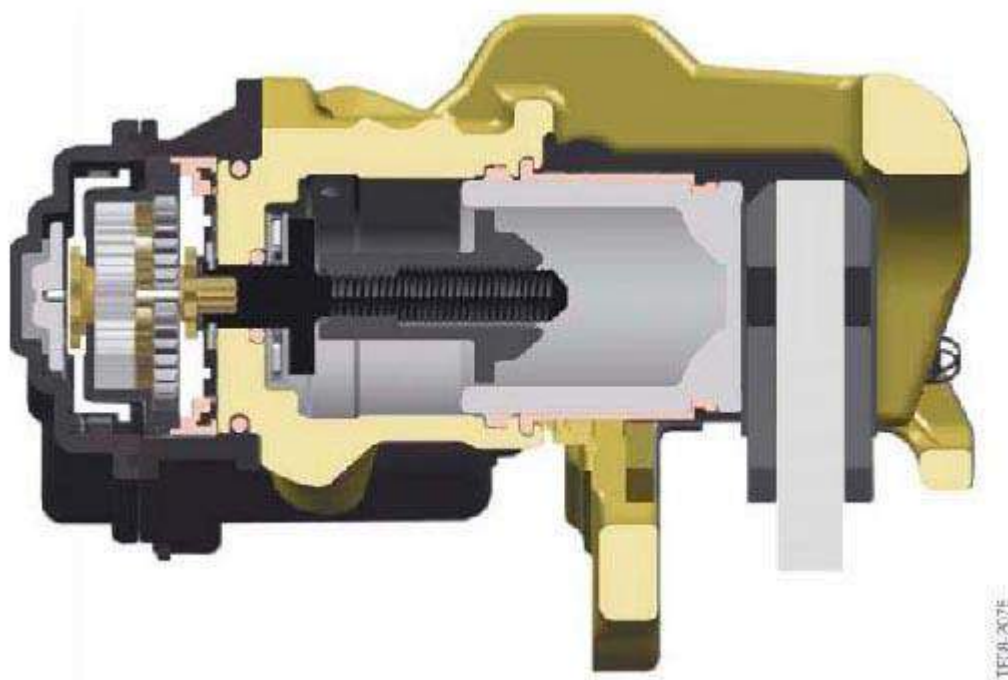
Identifying F10 Electromechanical Parking Brake With Spindle Nut In Working Position For Exchanging Brake Linings
